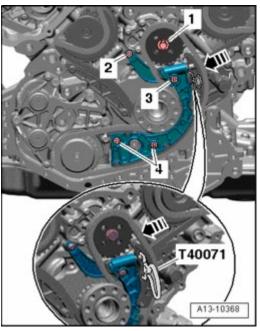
Pressing Tensioning Rail, Securing Chain Tensioner With Locking Pin T40071, Removing Bolts, Balance Shaft Chain Sprocket & Chain Tensioner
